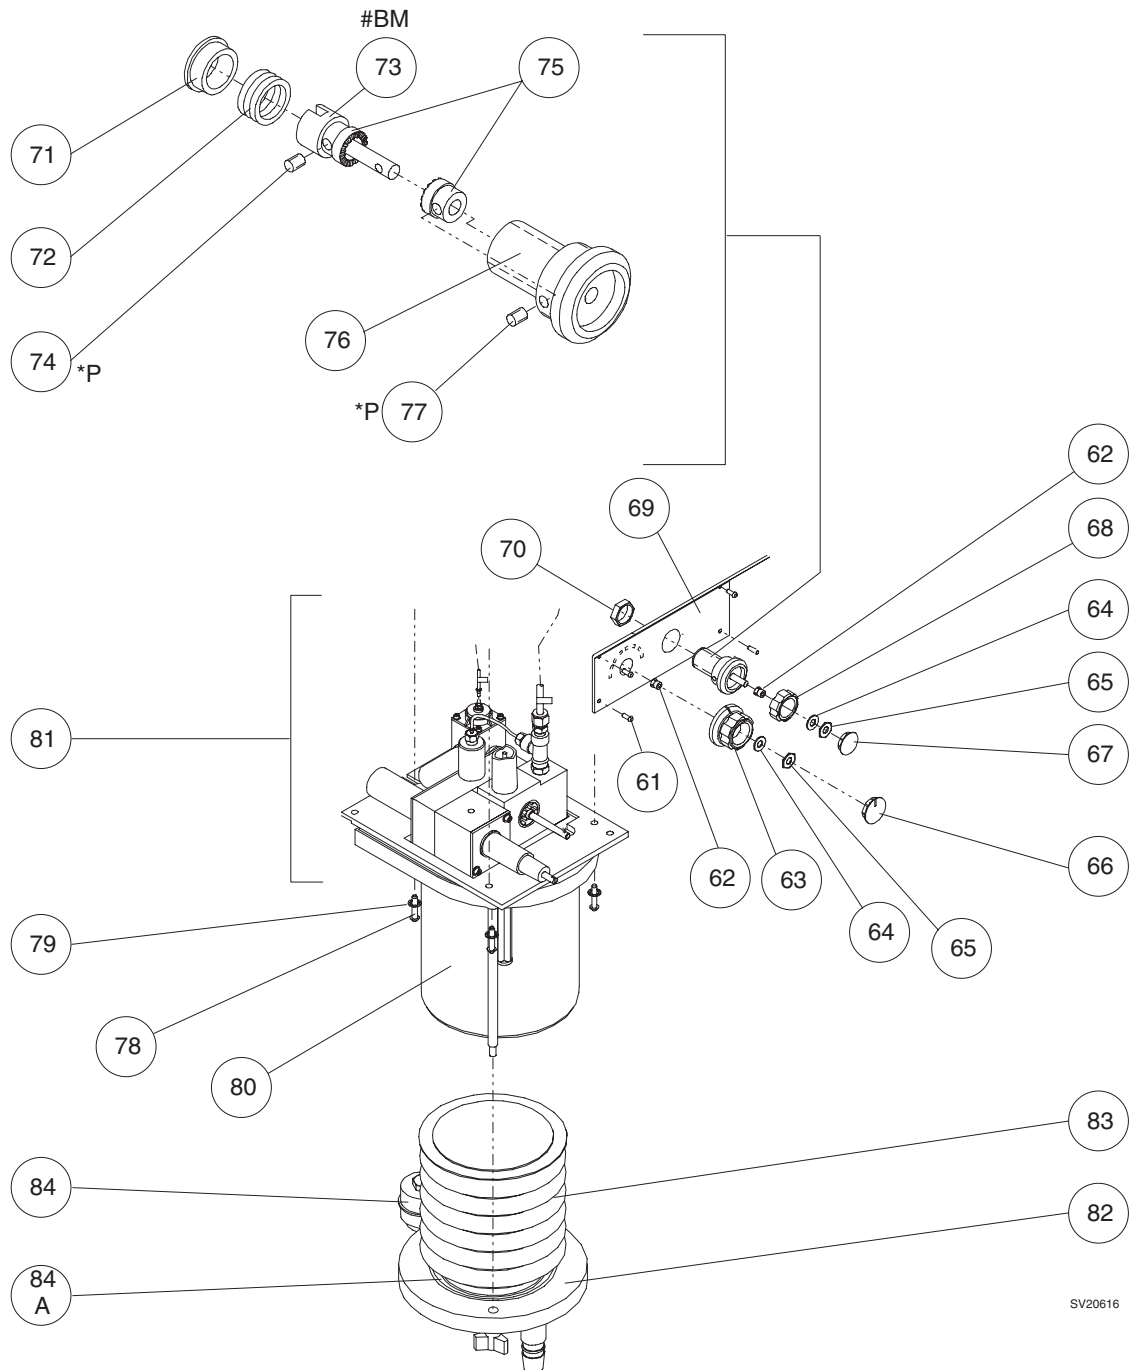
AV-E Ventilator Bellow Valve & Guide Assembly
